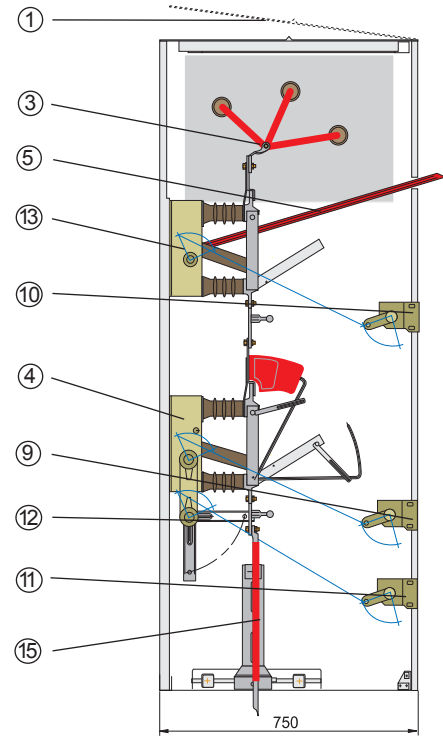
Side view of 12 kV cable panel with switch-disconnector H 22 EA/EK and disconnecting switch
